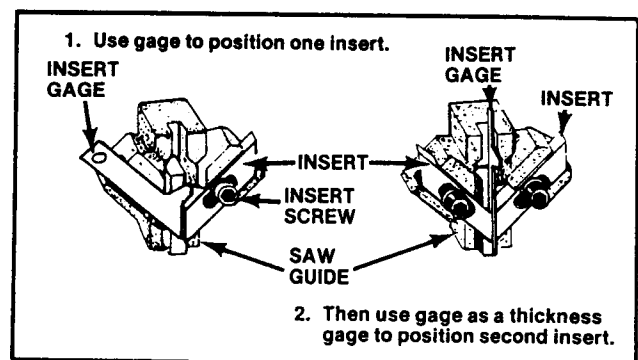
ADJUSTING CARBIDE-FACED INSERTS - UPPER GUIDE BLOCK SHOWN.
